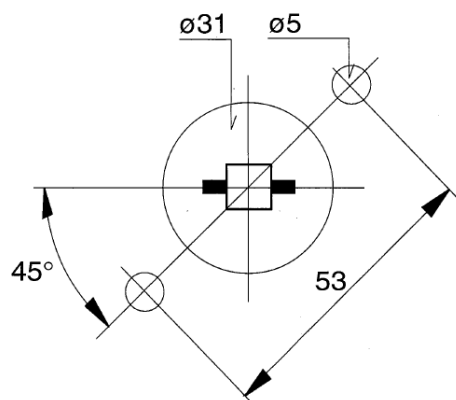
Location of handle-mounting holes for disconnect-switch handle (this figure is not to scale, use the to-scale drawing provided with the kit).
